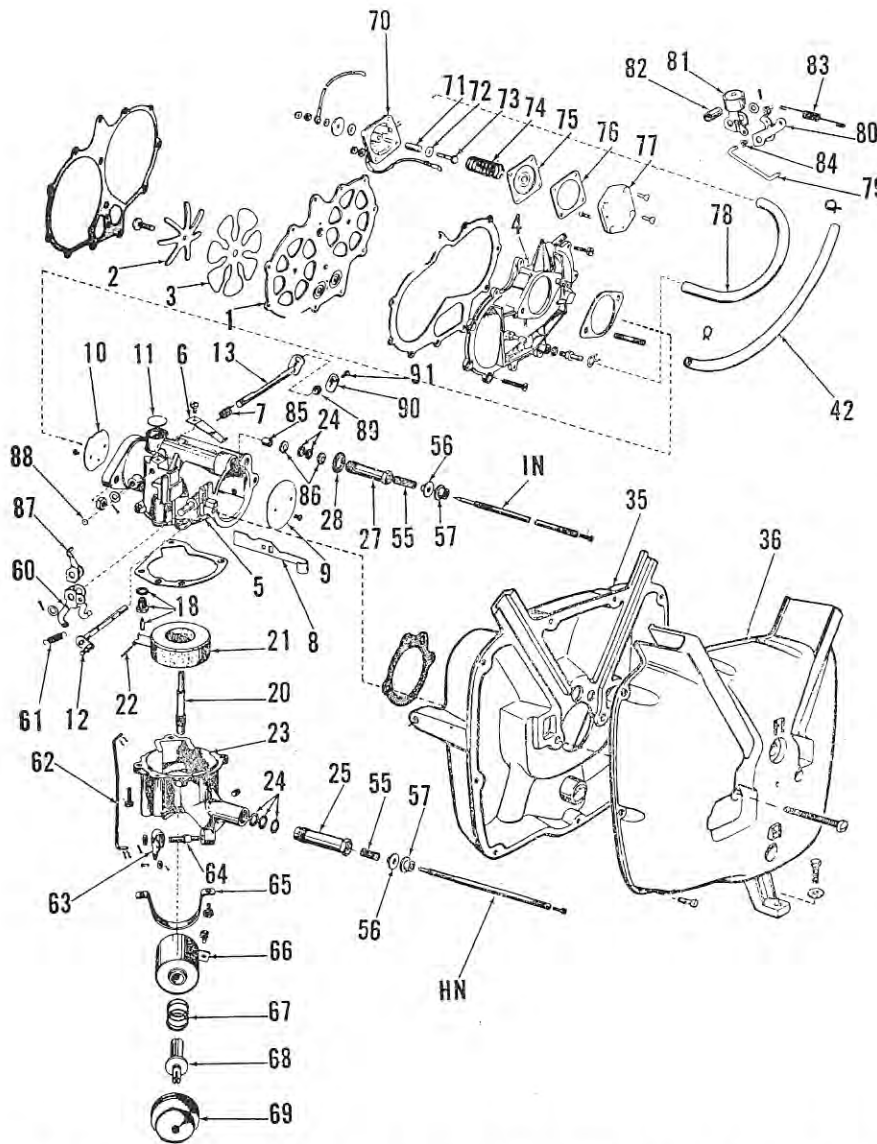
Exploded view of carburetor and reed valves assembly used on electric starting models. Choke solenoid assembly (62 through 69) is not used on models without electric starter.
